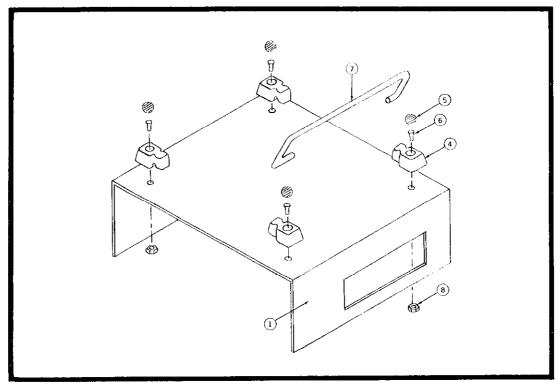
Cover Assembly, Refer to Table 7-4.
